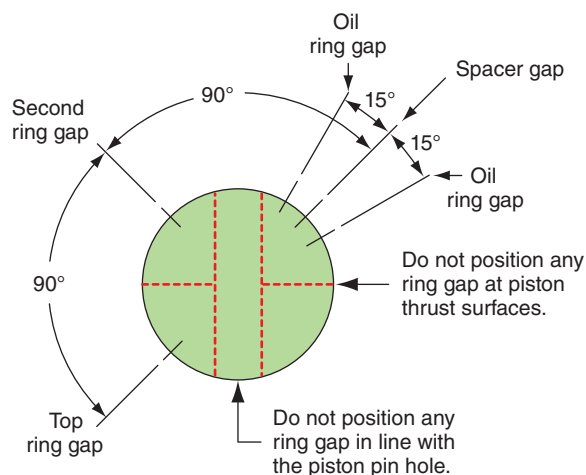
Make sure that the ring end gaps are arranged according to specifications.
